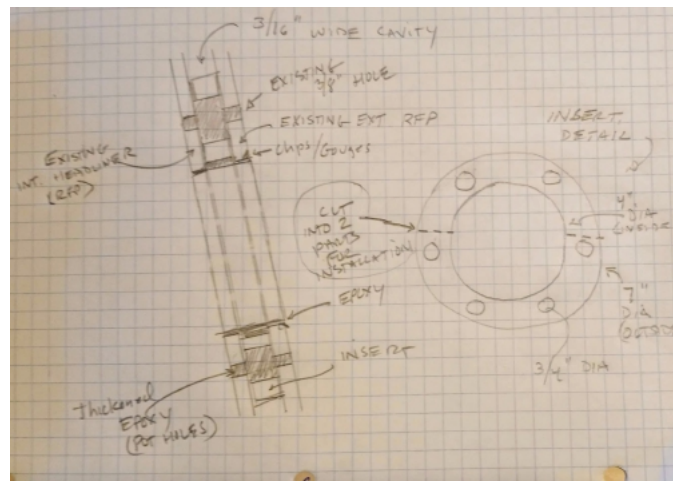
Plan for solution diagram. Left, a cross section view of wall area, insert and coring. Right, insert filler ring to strengthen and fill wall cavity, cut into two halves (dashed lines) to facilitate installation.
